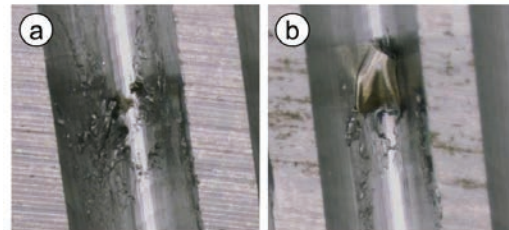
(a) Small chip welding; (b) Massive chips welded on the surface
